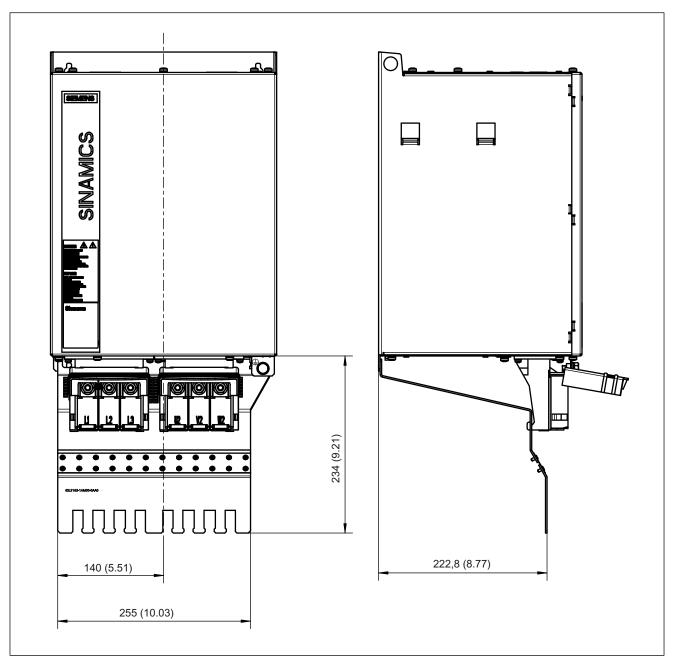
Dimension drawing of shield connecting plate on the 80 and 120 kW Active Interface Module, all dimensions in mm and (inches)
